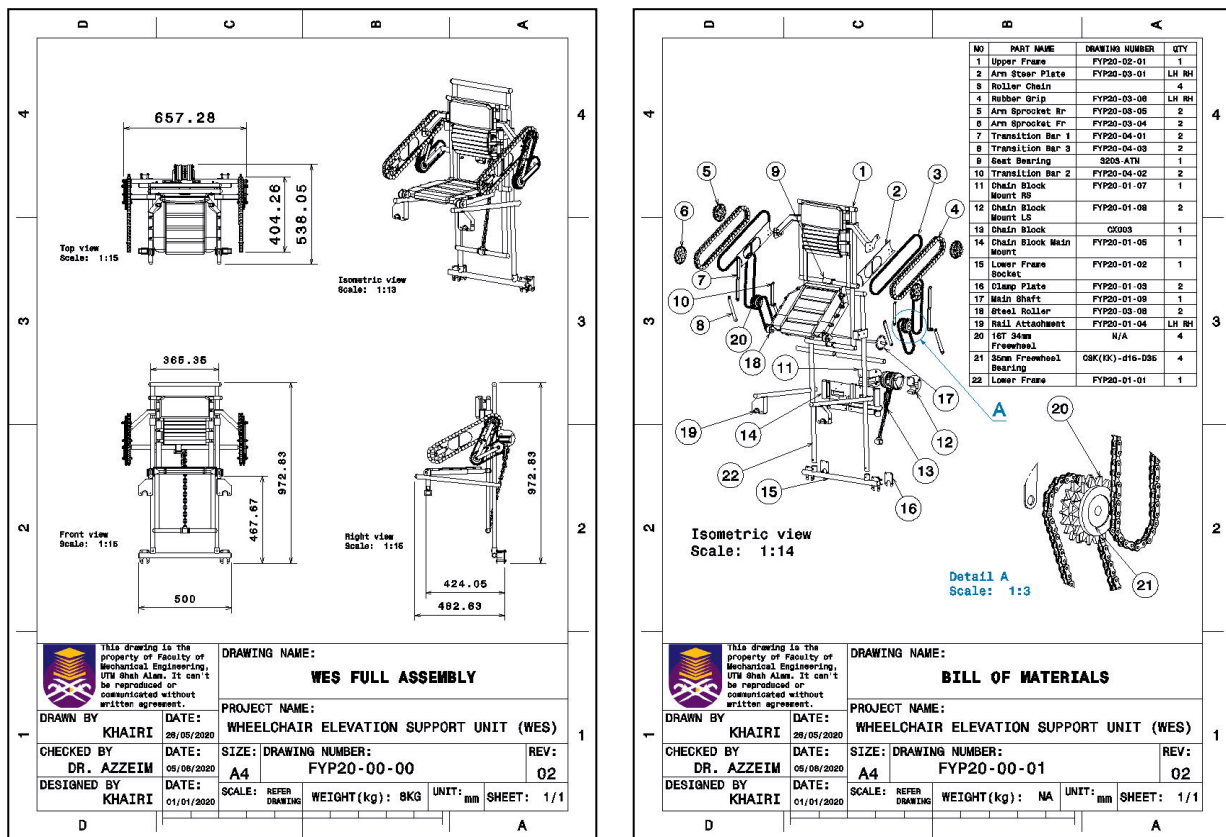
Assembly drawing (left) and bill of material (right) of the WES
